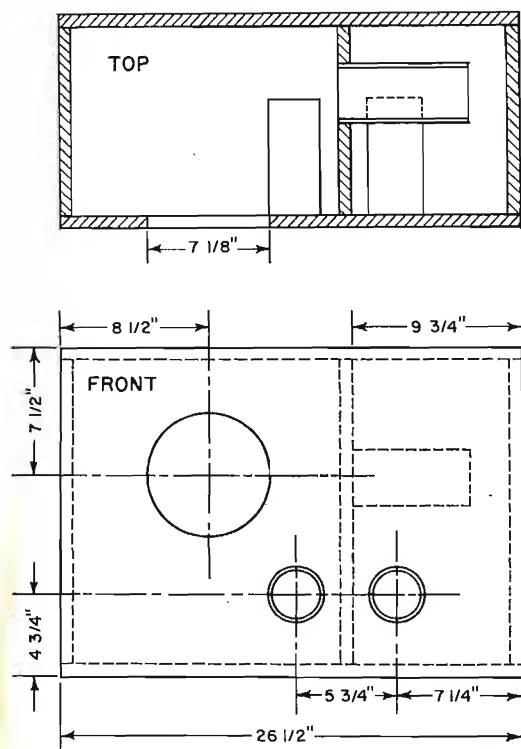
Construction details of enclosure. Three-quarter-inch particle board is employed along with three 7 1/2" long 2 3/4" inside diameter cardboard mailing tubes.
